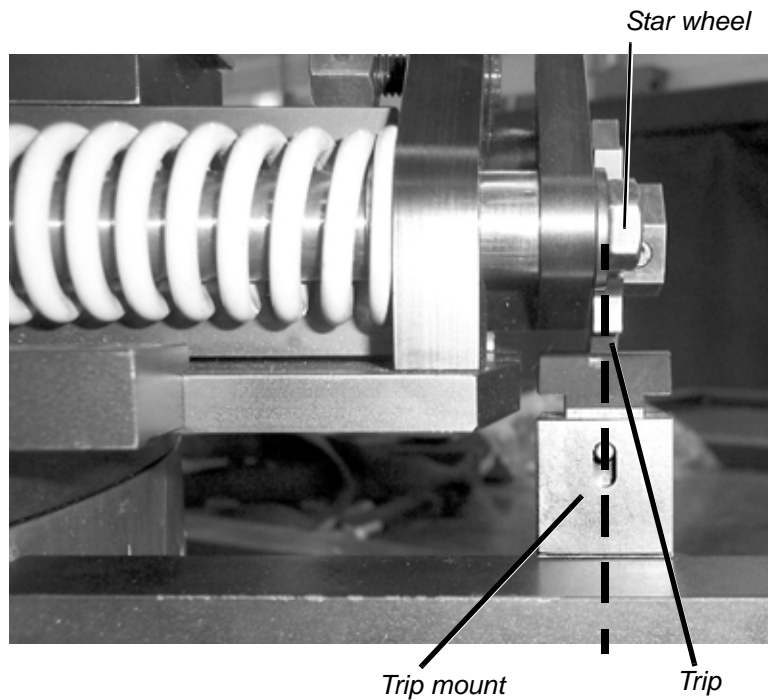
The trip mount should be positioned so that the contact points of the star wheel strike the center of the trip.
